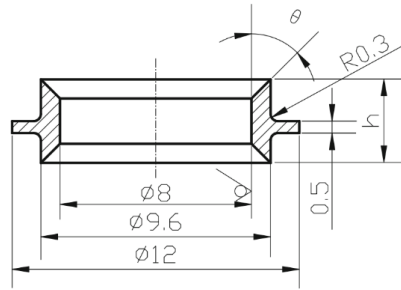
Section view of the T-SPR rivet and its dimensional parameters.
